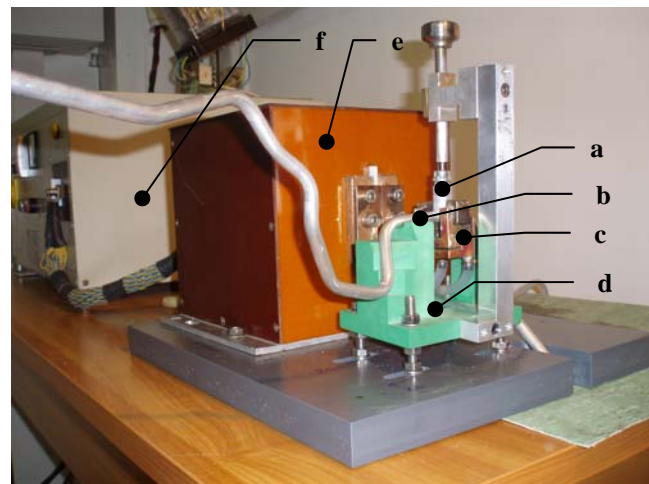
Experimental setup for induction brazing: a - vertical tube; b - horizontal tube; c - inductor; d - positioning device; e - transformer; f - induction generator.
